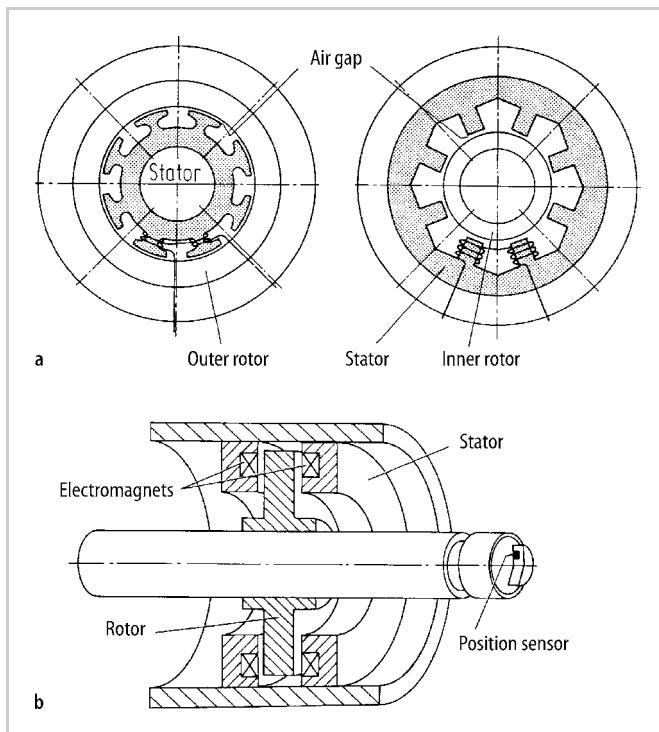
Types of magnetic bearing [8.1]. a radial bearing, b axial bearing
